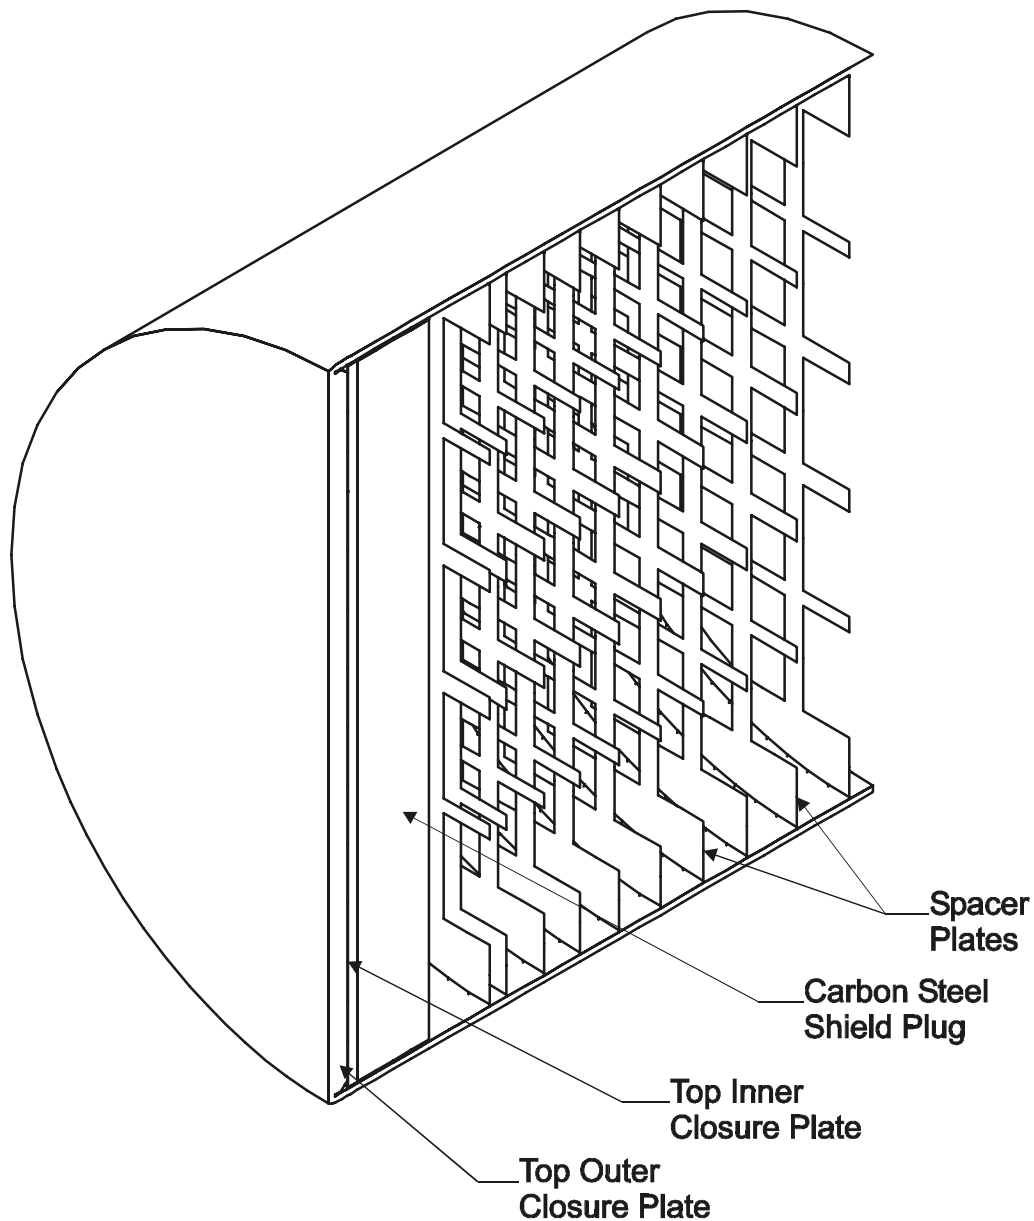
W21 Canister Shell Assembly Half-Symmetry Finite Element Model
